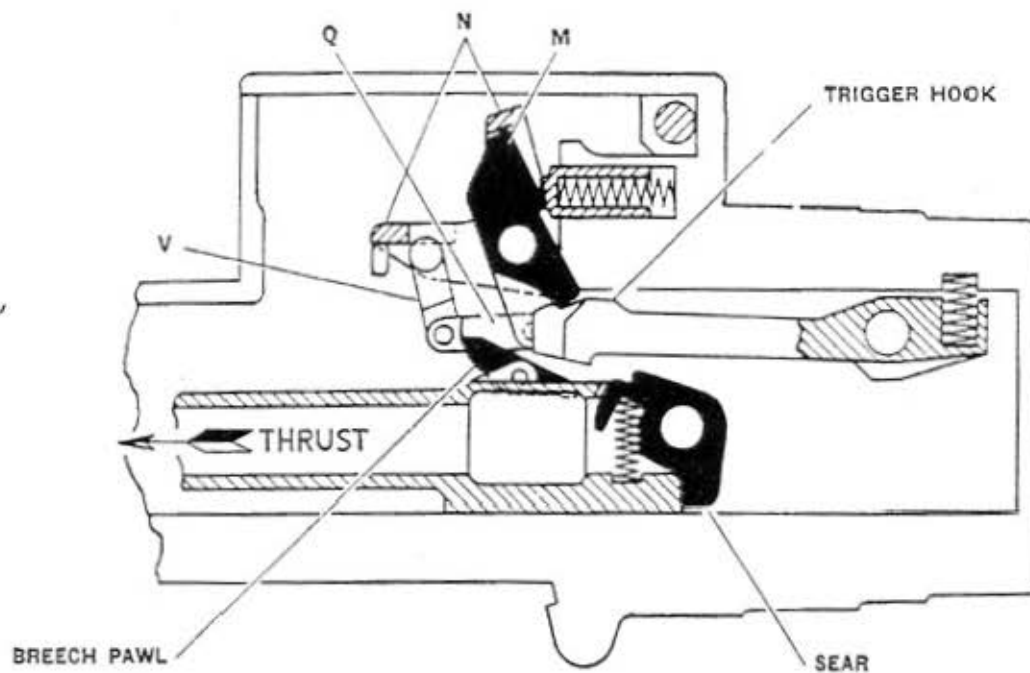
Interlock tripped, recoiling mass about to start counterrecoil and be held in cocked position by breech pawls engaging parallelogram bottom lever lugs
